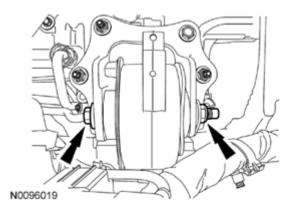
Locating Transaxle Mount Through Bolt And Nut Courtesy of FORD MOTOR CO.
